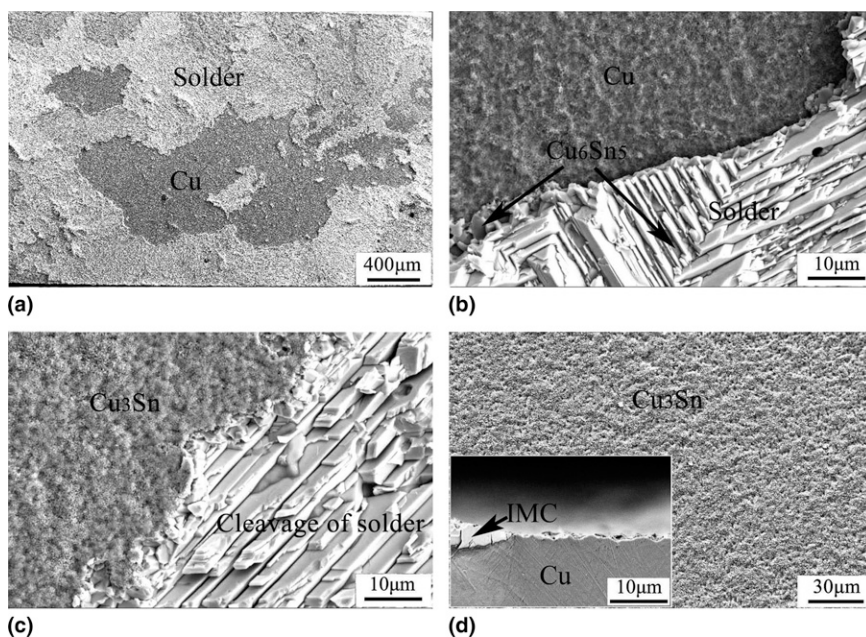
Tensile fracture surfaces of the long-term aged SnBi/Cu samples. (a) Macroscopic morphology. (b, c) Microscopic morphology of the fracture surfaces. (d) Microscopic morphology and side surface of brittle fracture region.
